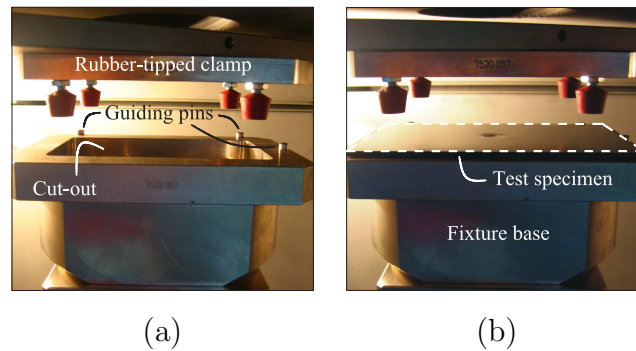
Detail of the clamping system, (a) without specimen and (b) with specimen.
